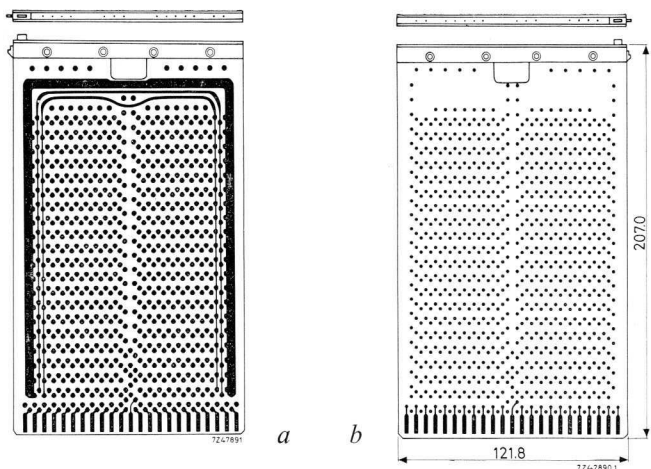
The GPB60 with extractor. (a) track side; (b) pad side
